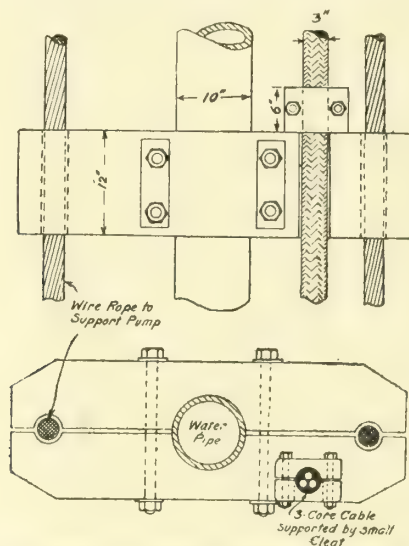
CLAMP FOR WATER PIPE AND SINKING CABLE.
